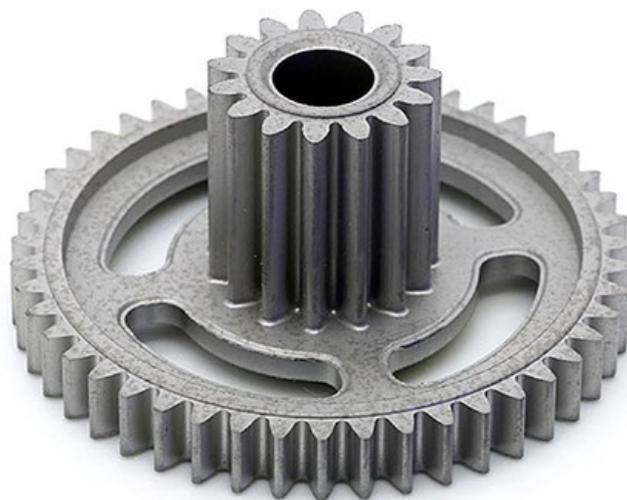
Capstan Inc, received a Grand Prize for this compact brushless DC actuator gear (Courtesy MPIF)
